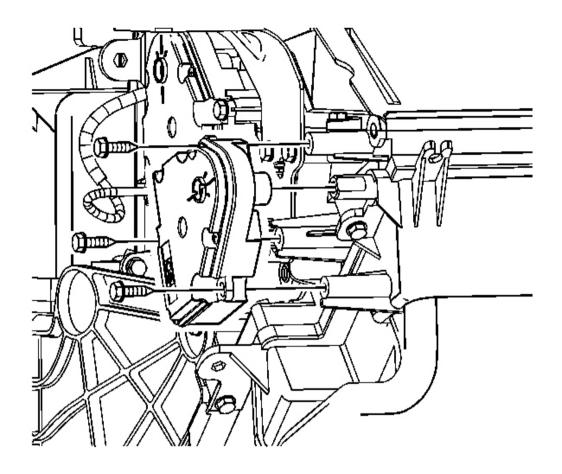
Heater Duct, Screws & Heater Core Cover Courtesy of GENERAL MOTORS CORP.
